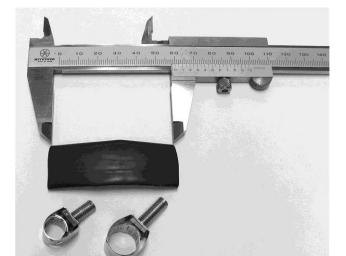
shows a 60 mm long section of heat shrink type RW200-E, 12.7 mm inner diameter before shrinking.
